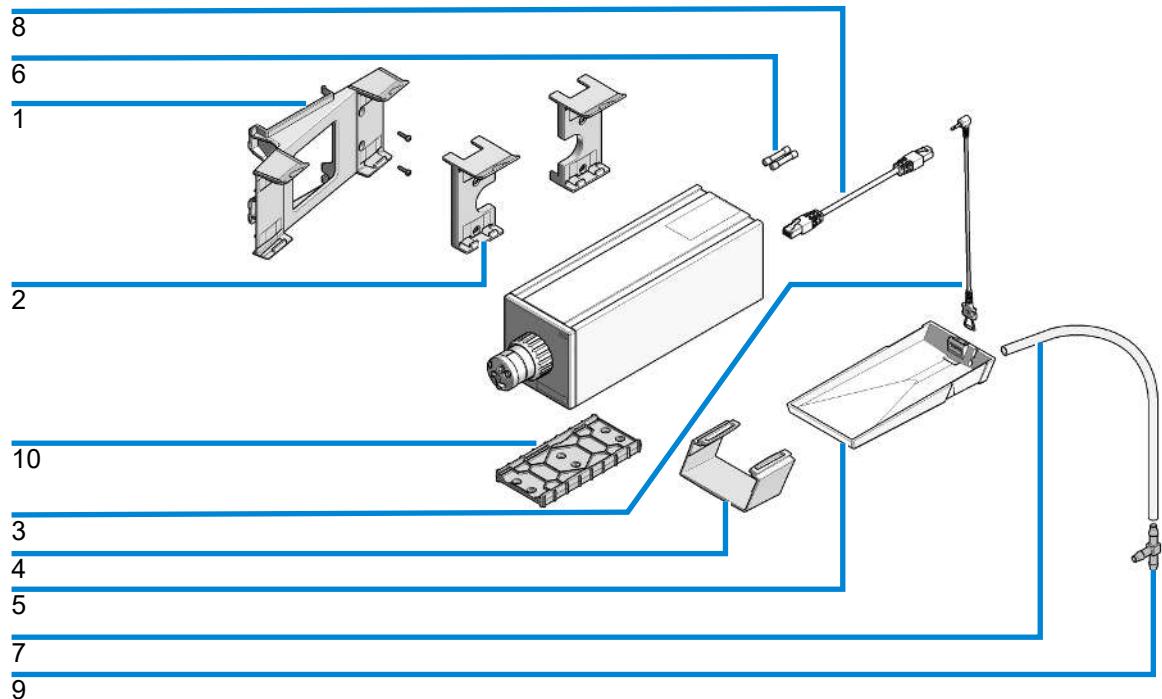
Parts for 1290 Infinity II/III Valve Drive
